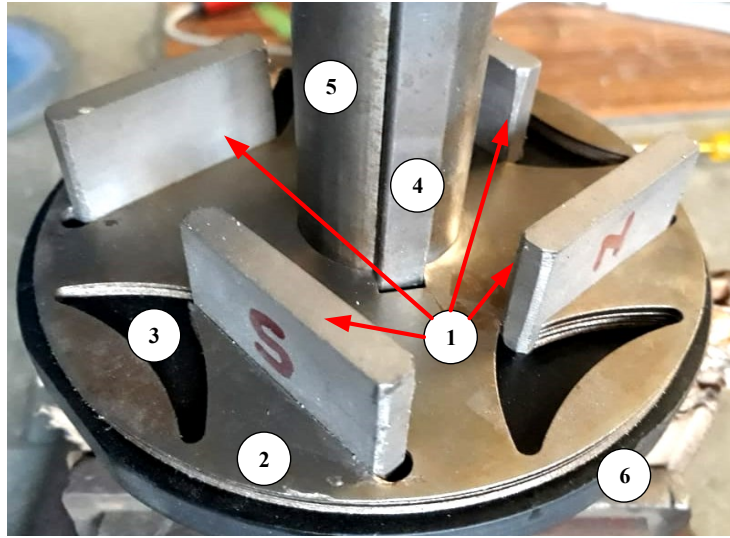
Prototyped rotor. (1) SmCo18 magnets. (2) Rotor lamination. (3) Flux barrier. (4) Keyway. (5) Shaft. (6) Bakelite end plate.
